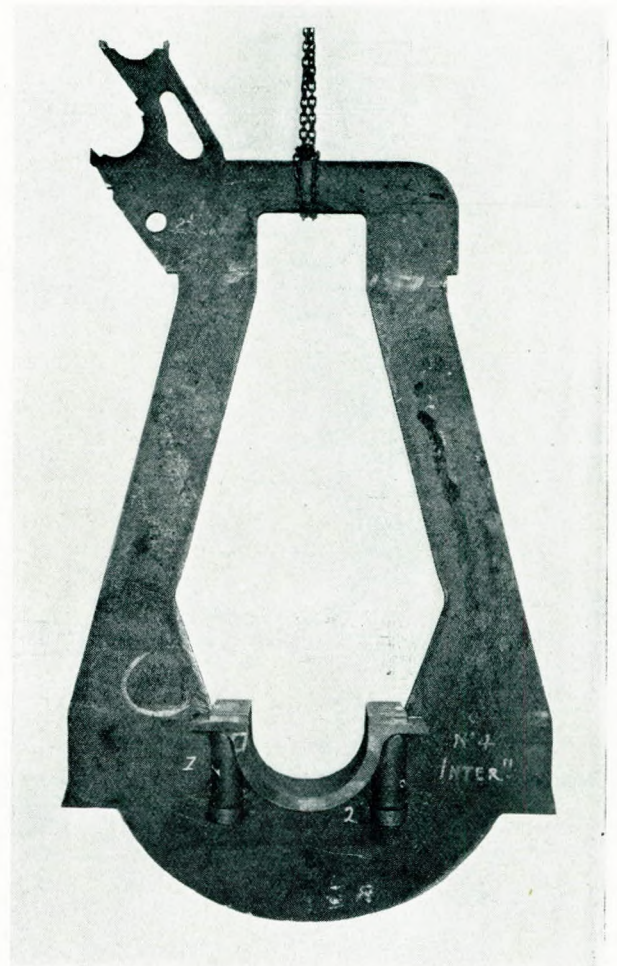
Main sling frame with bearing welded in and showing the extension for the cam shaft bearings.
